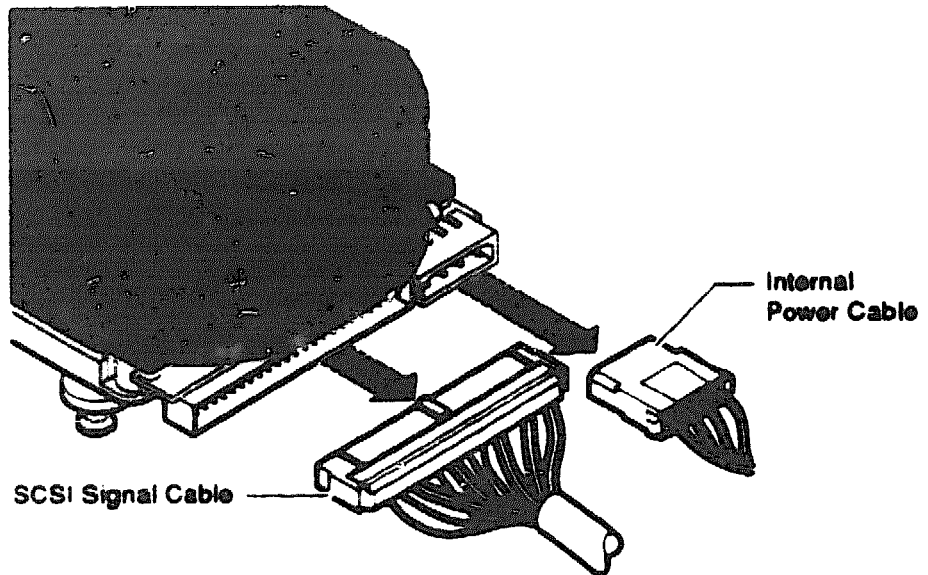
Removing RZxx Hard Disks from the Drive Plate
